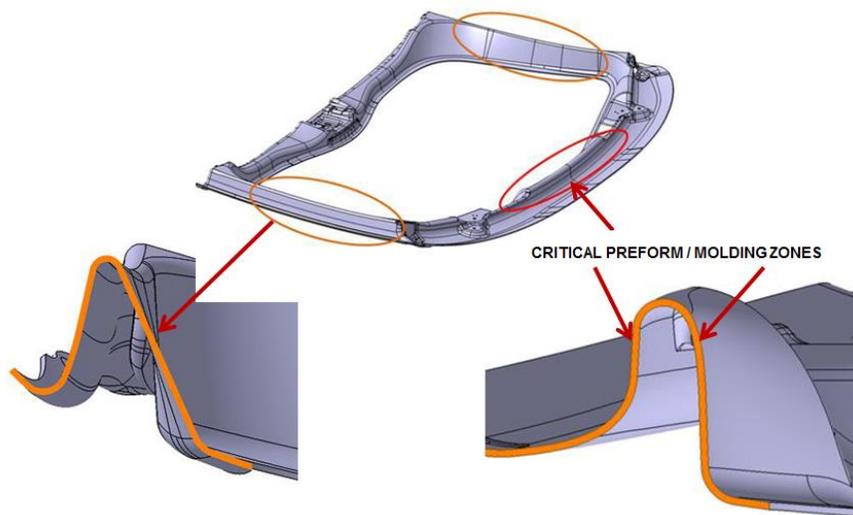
Identification of Challenging Preform Areas / Molding Zones of CFRP Part Design.
